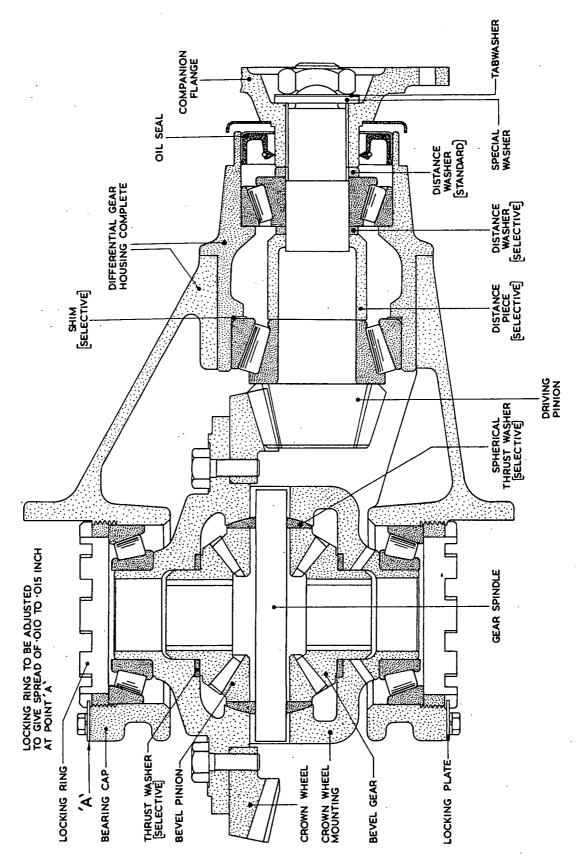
Assembly of differential unit (Fixed bearing housing)
